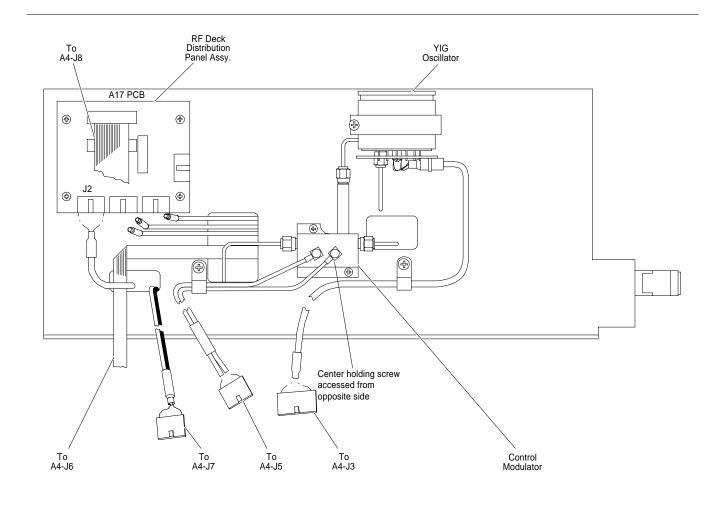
Models 54128A, 54130A, 54131A, and 54136A RF Deck Parts Location (Internal Side Detail)
